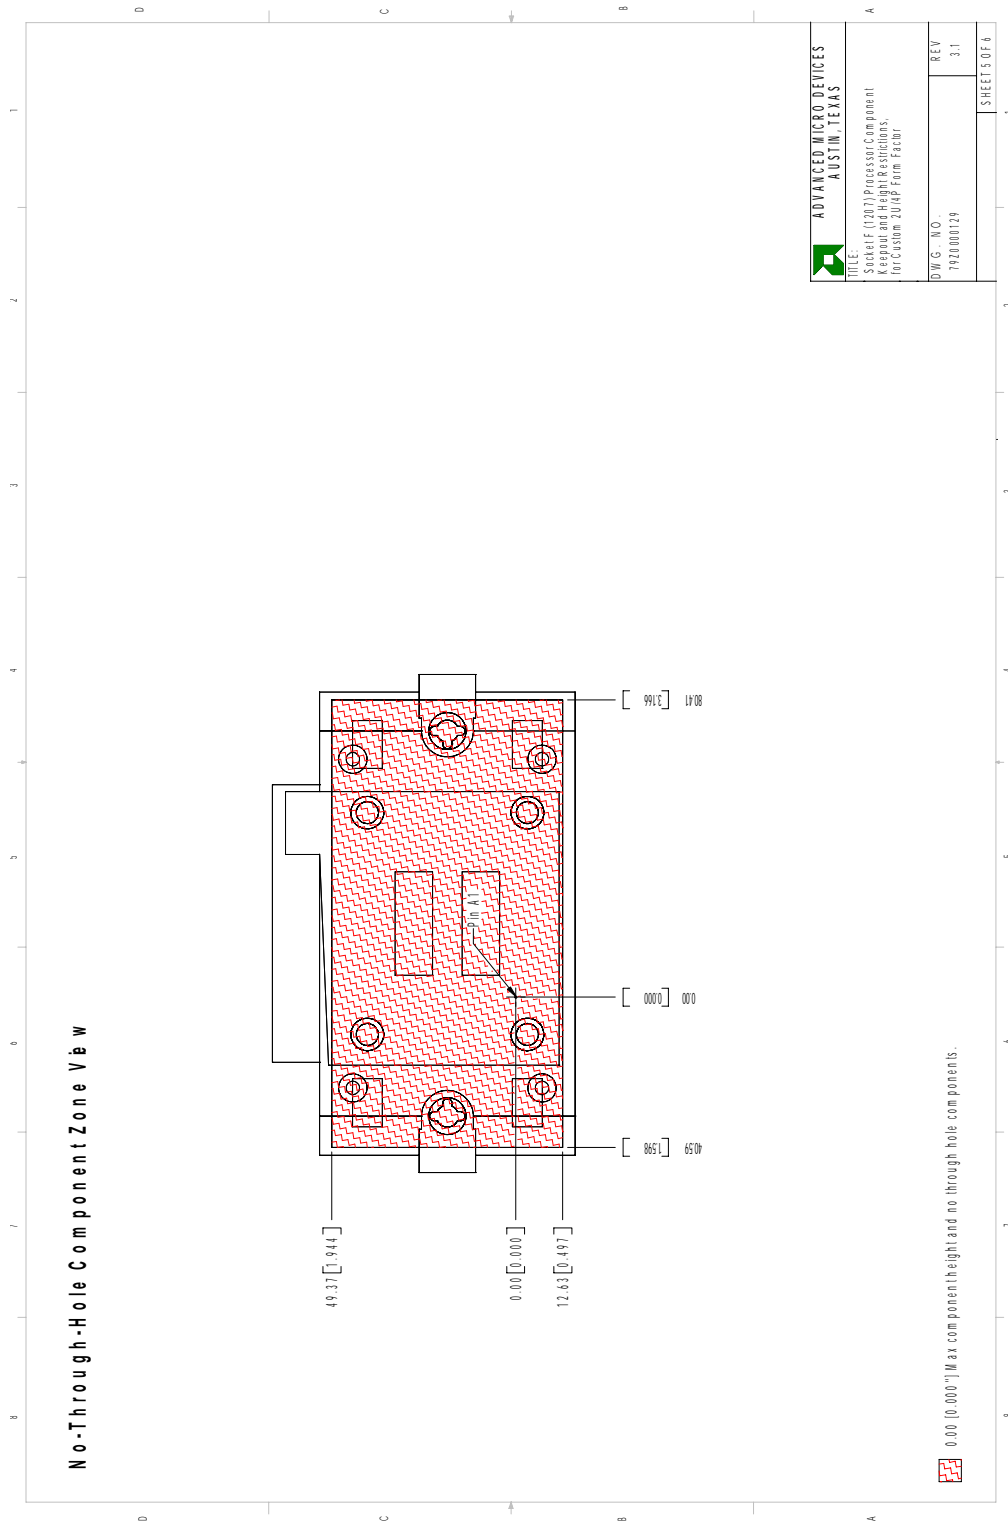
Socket F (1207) 2U-4P Board No-Through-Hole Keep-Out
